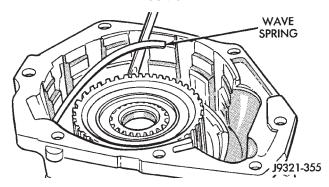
Overdrive Clutch Wave Spring Removal/ Installation
